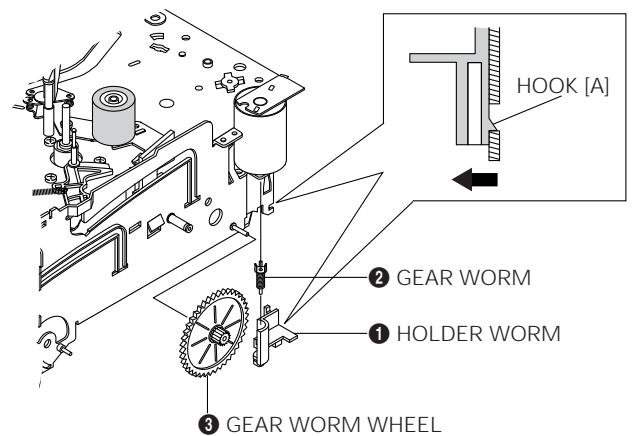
Holder Worm, Gear Worm, Gear Worm Wheel Removal
